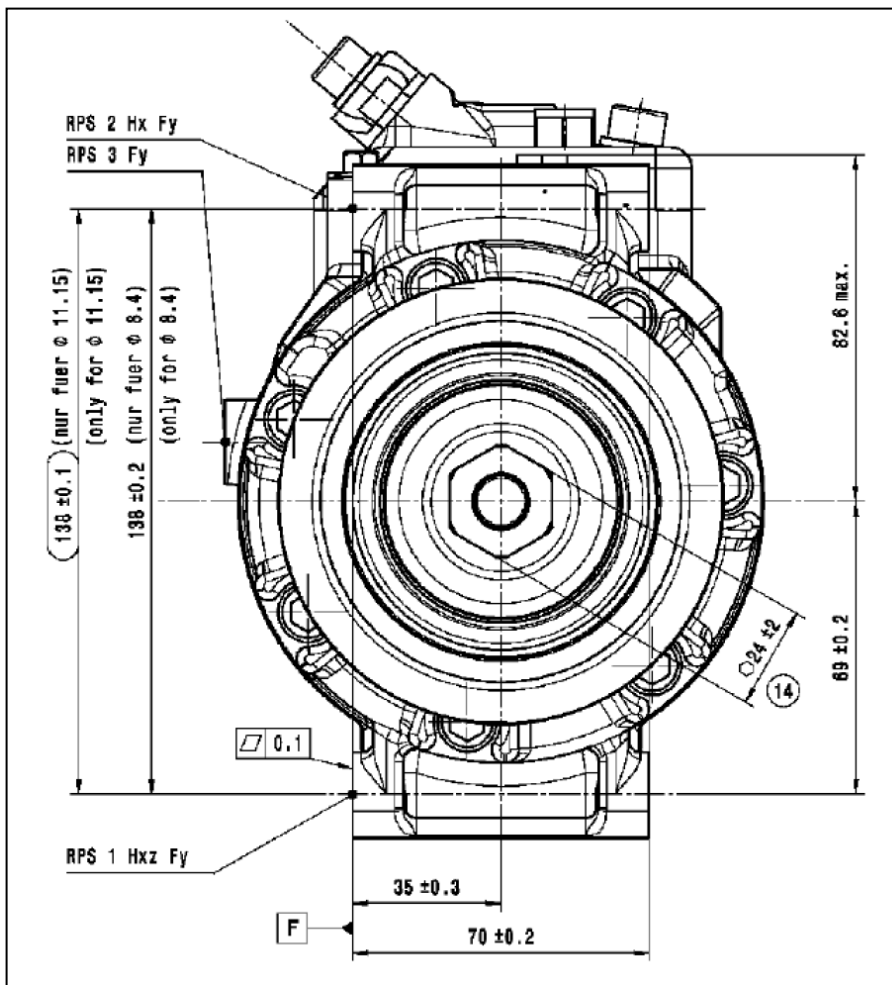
Dimensions of air conditioner compressor Denso 7SU17 (7E0.820.803) (front view)
